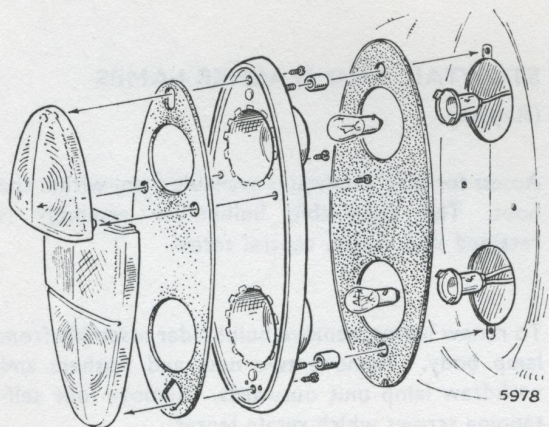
Exploded view of stop/tail and rear flasher lamps
